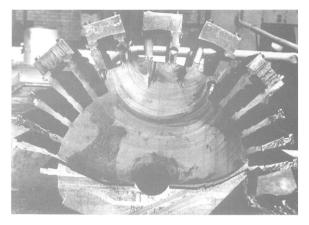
Fretting fatigue failure example of turbogenerator rotor.
